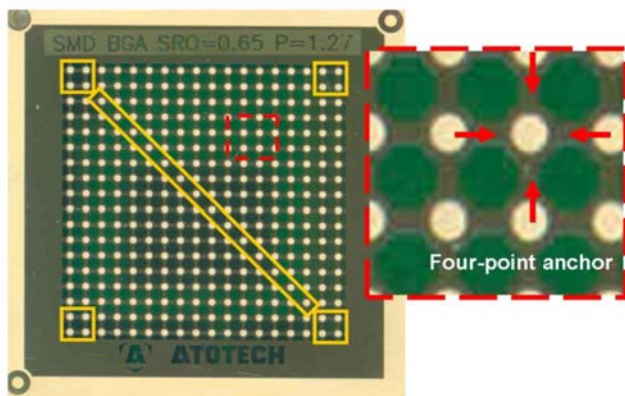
BGA test vehicle for cold ball pull testing showing location of solder balls tested and detail of four-point anchor design (under solder mask).
